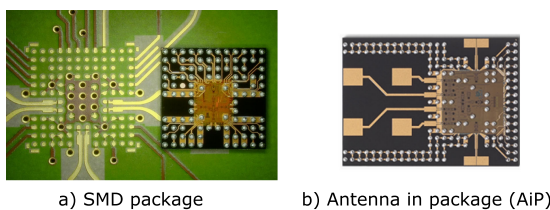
Surface mount packages for millimeter wave radar transceivers.
